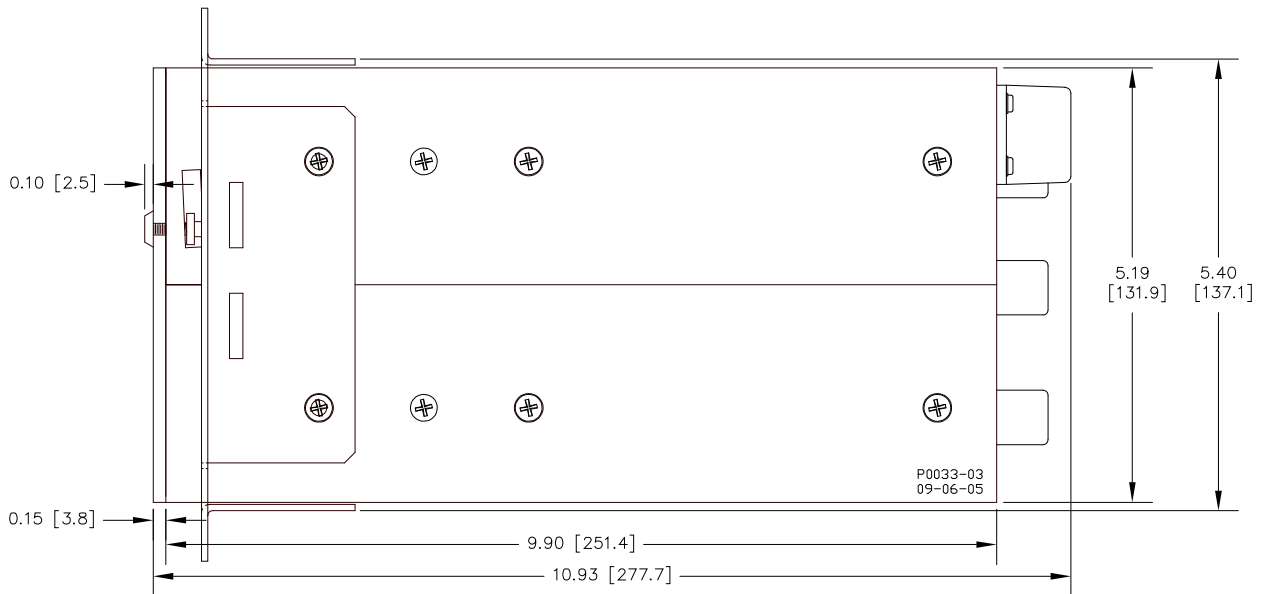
Vertical Panel Mount, M-size, Top View, or Horizontal Panel Mount Side View
